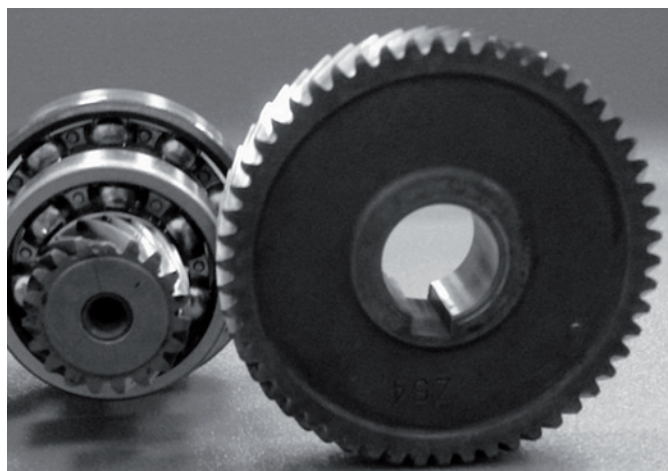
View of the tested samples of cylindrical skew gears – gears no. 3 (Tab. 5)
